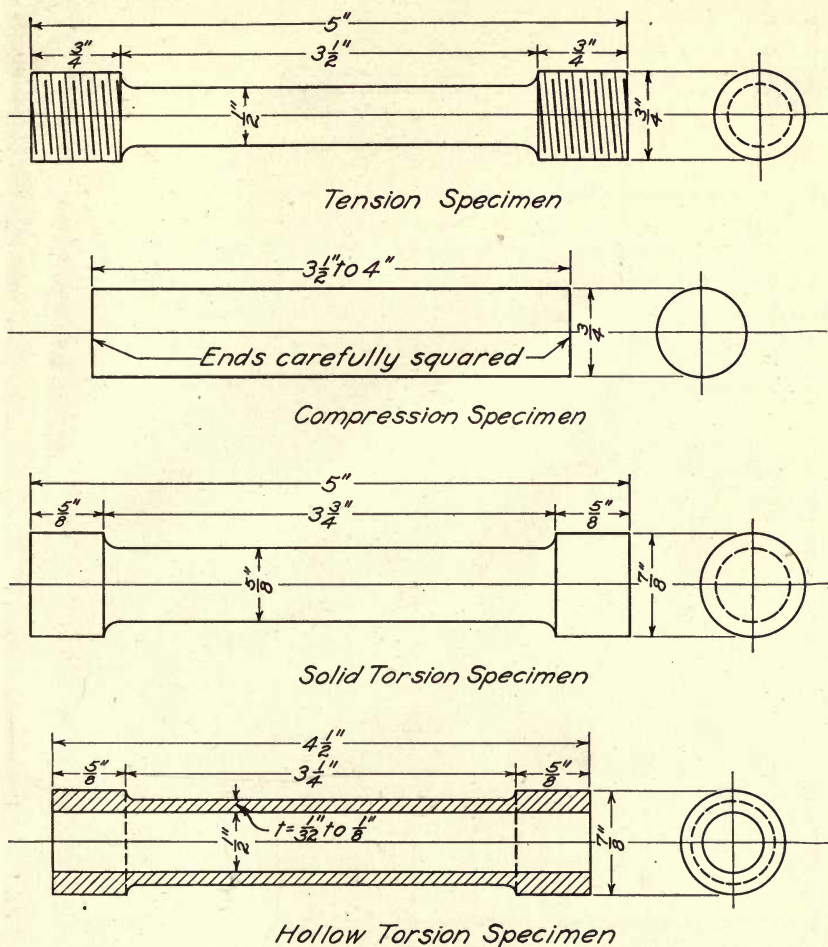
FORM AND DIMENSIONS OF SMALL TEST SPECIMENS
